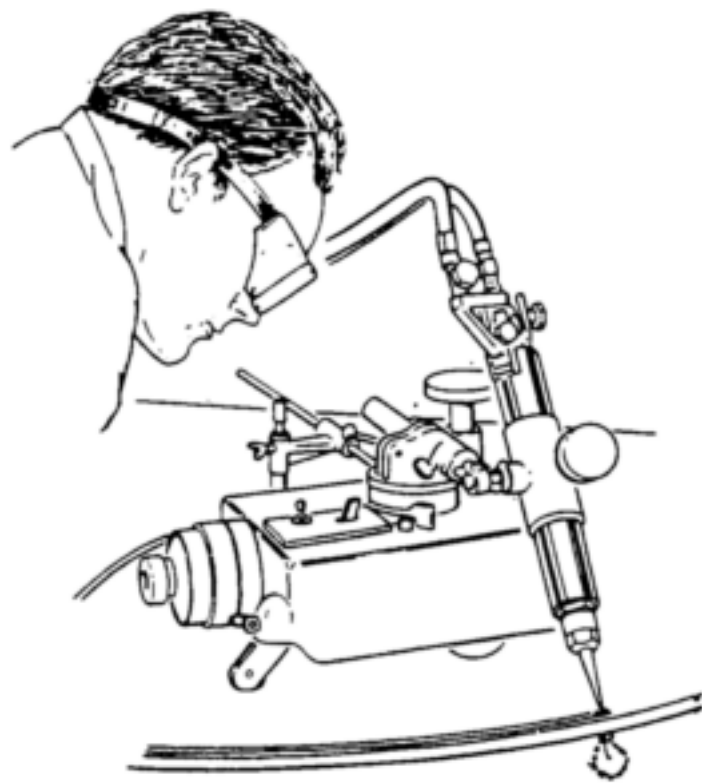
Making a bevel on a circular path with a cutting machine.
